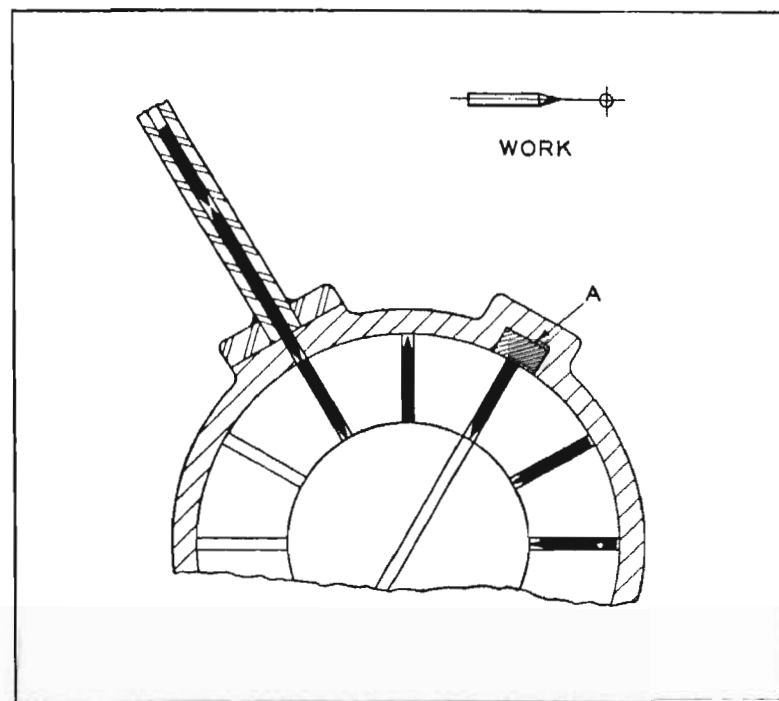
Permanent Magnet (A) Prevents Parts that are Fed to it in the Wrong Position from Being Transferred to a Machine.
